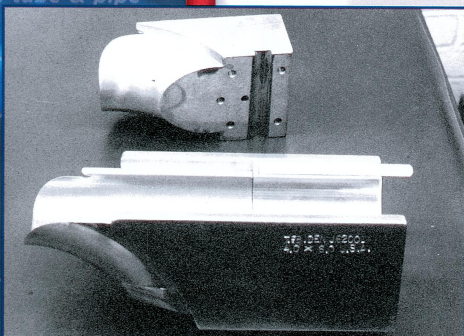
The ultimate wiper die, with Kro-Lon® on special steel and lube holes on both tube groove and C.L.R. surfaces.
